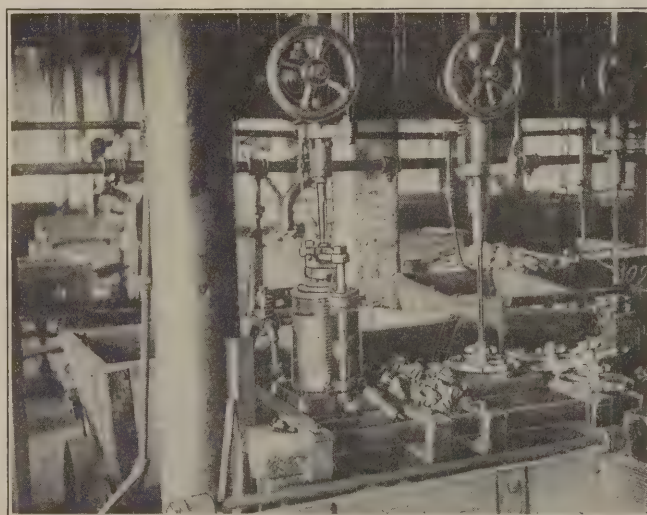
Clamping Jig in Use, with Pinion Centering Device.
